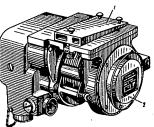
INSTALLATION OF BRACKETS ON HJT-47 3M HOIST 1 - bracket; 2 - BJI - 473M hoist.
